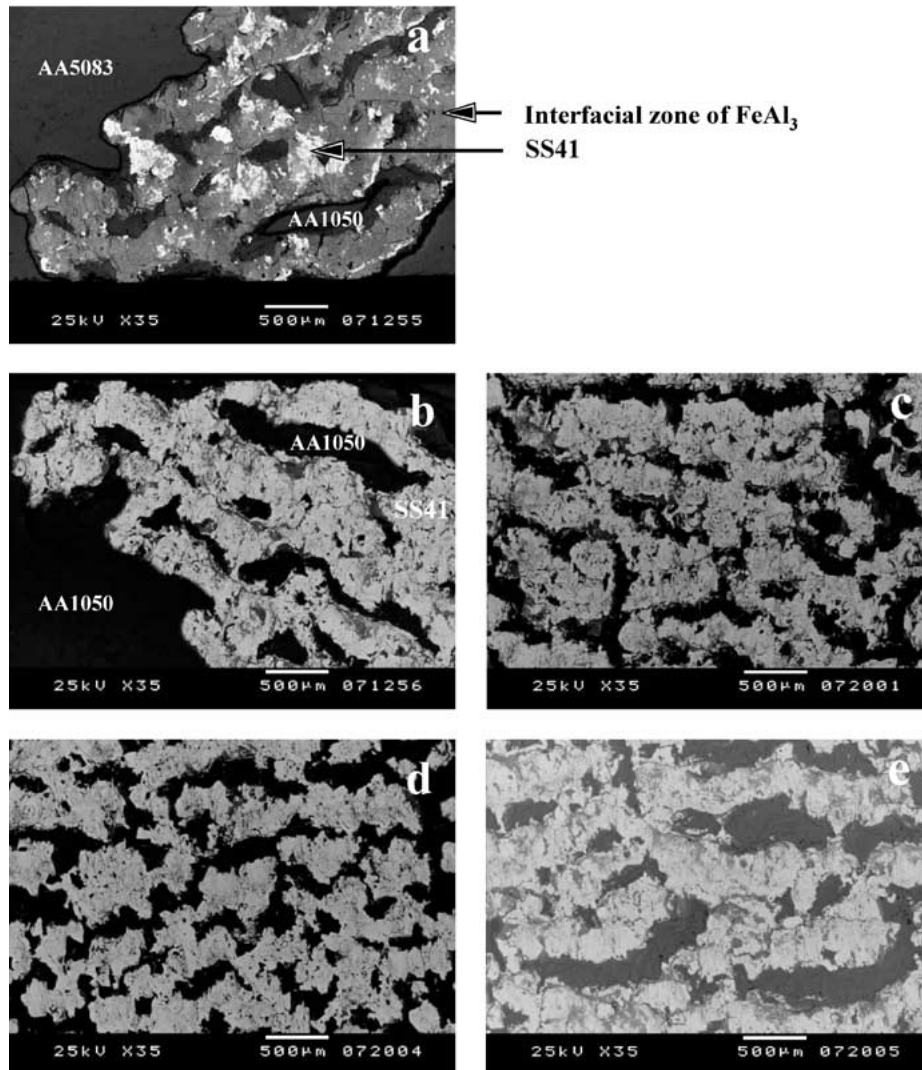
Back scattered electron images of the fractured surfaces, in which (a) and (b) are a pair of the fractured surfaces in the specimen with 0.2 mm-thick interlayer, and (c), (d) and (e) are one side (SS41 part like the Fig. 8b) of the fractured surfaces with 0.5, 1.0 and 2.0 mm-thick interlayer, respectively.
